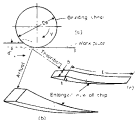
GRINDING GEOMETRY (a) SURFACE GRINDING OPERATION (b) ACTUAL SHAPE OF CHIP (c) THEORETICAL SHAPE OF CHIP
